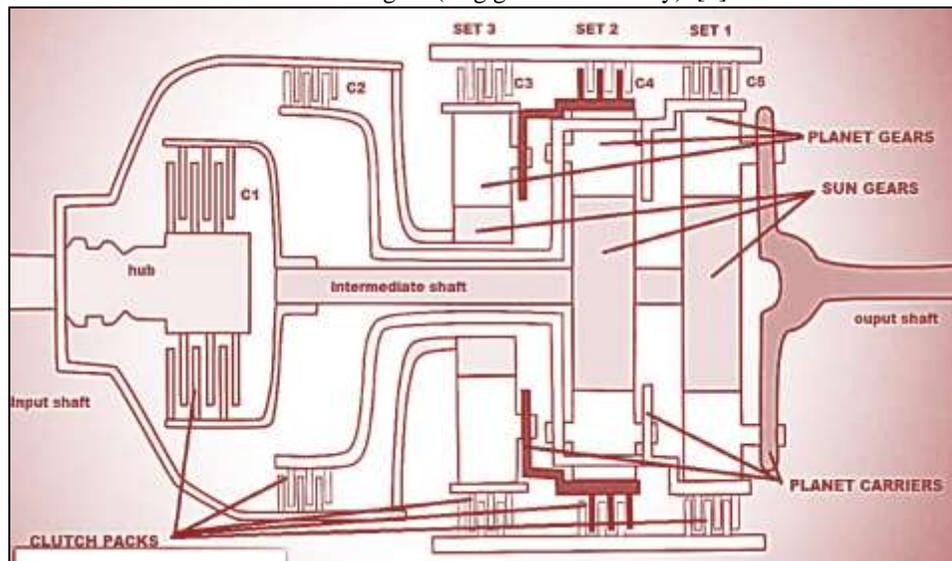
planetary gearbox in the hydraulic automatic transmission.
